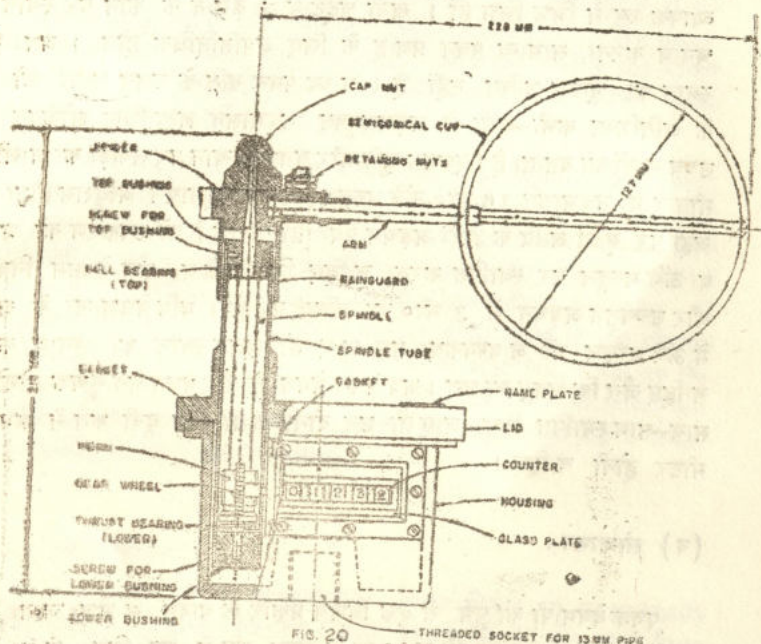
CUP COUNTER ANEMOMETER MK-II DETAILS
